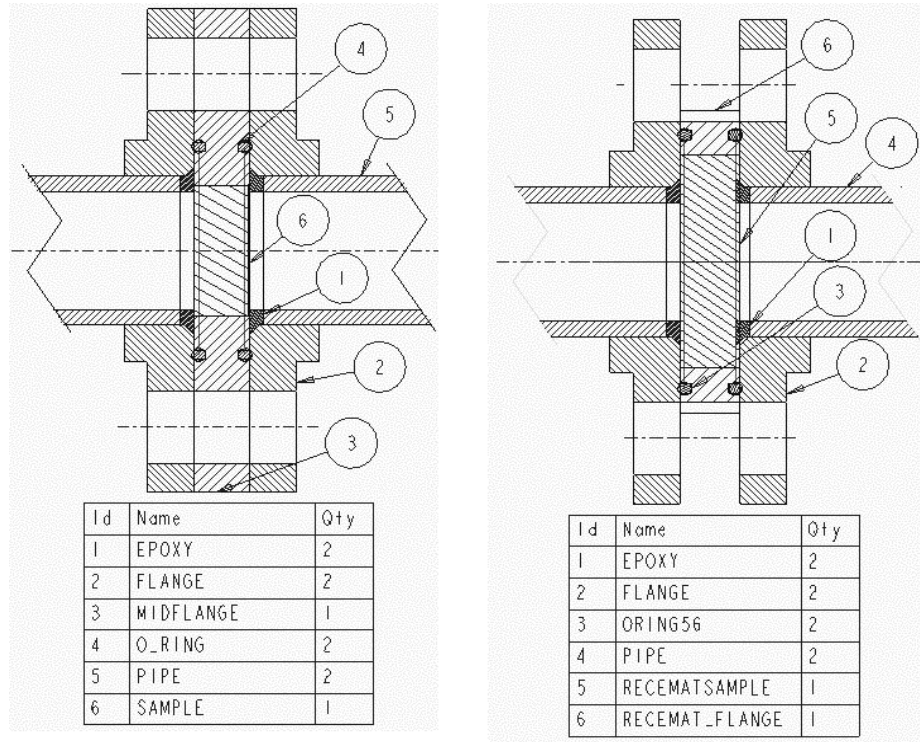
Flange Assembly (a) IMIMF (b) RMF
